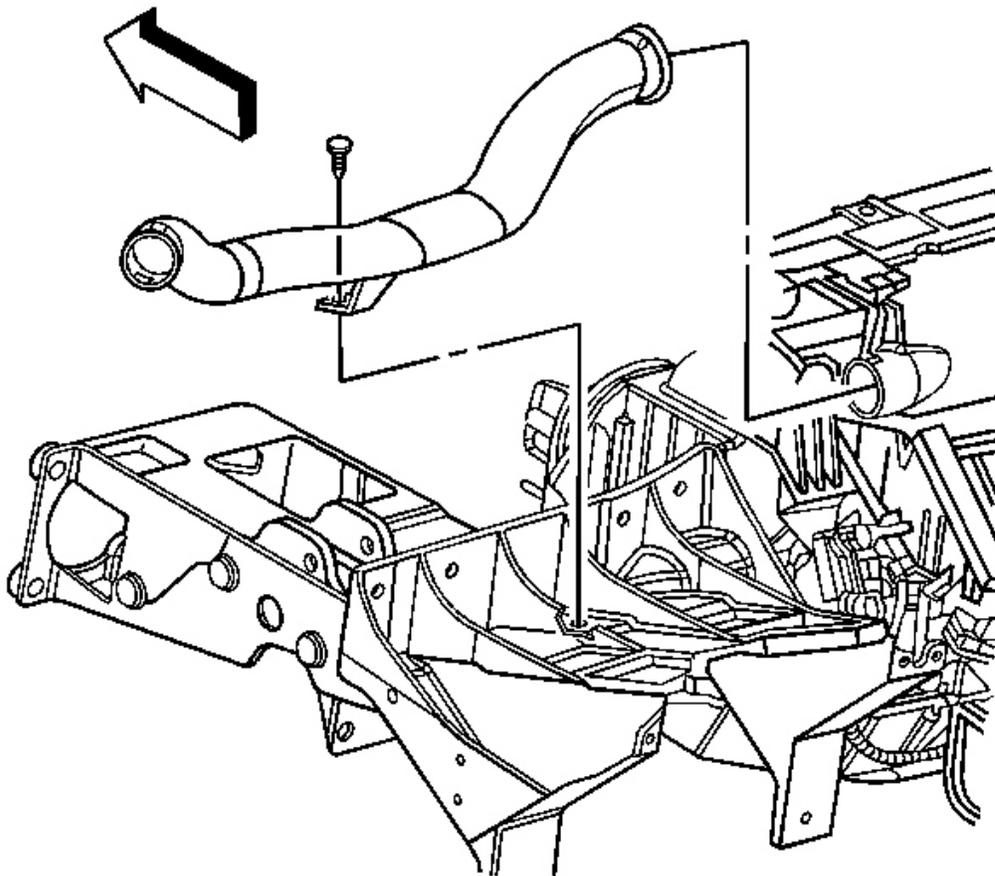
Identifying Lower Defogger Outlet Duct & Retainer
